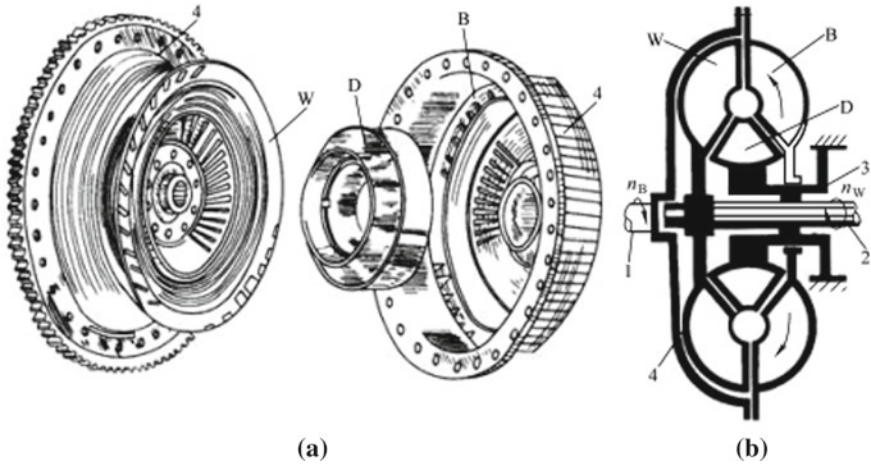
Mechanical structure of hydraulic torque converter. 1—engine crankshaft, 2—driven shaft, 3—guide wheel fixing casing, 4—torque converter housing. B—impeller, W—turbine, D—guide wheel
